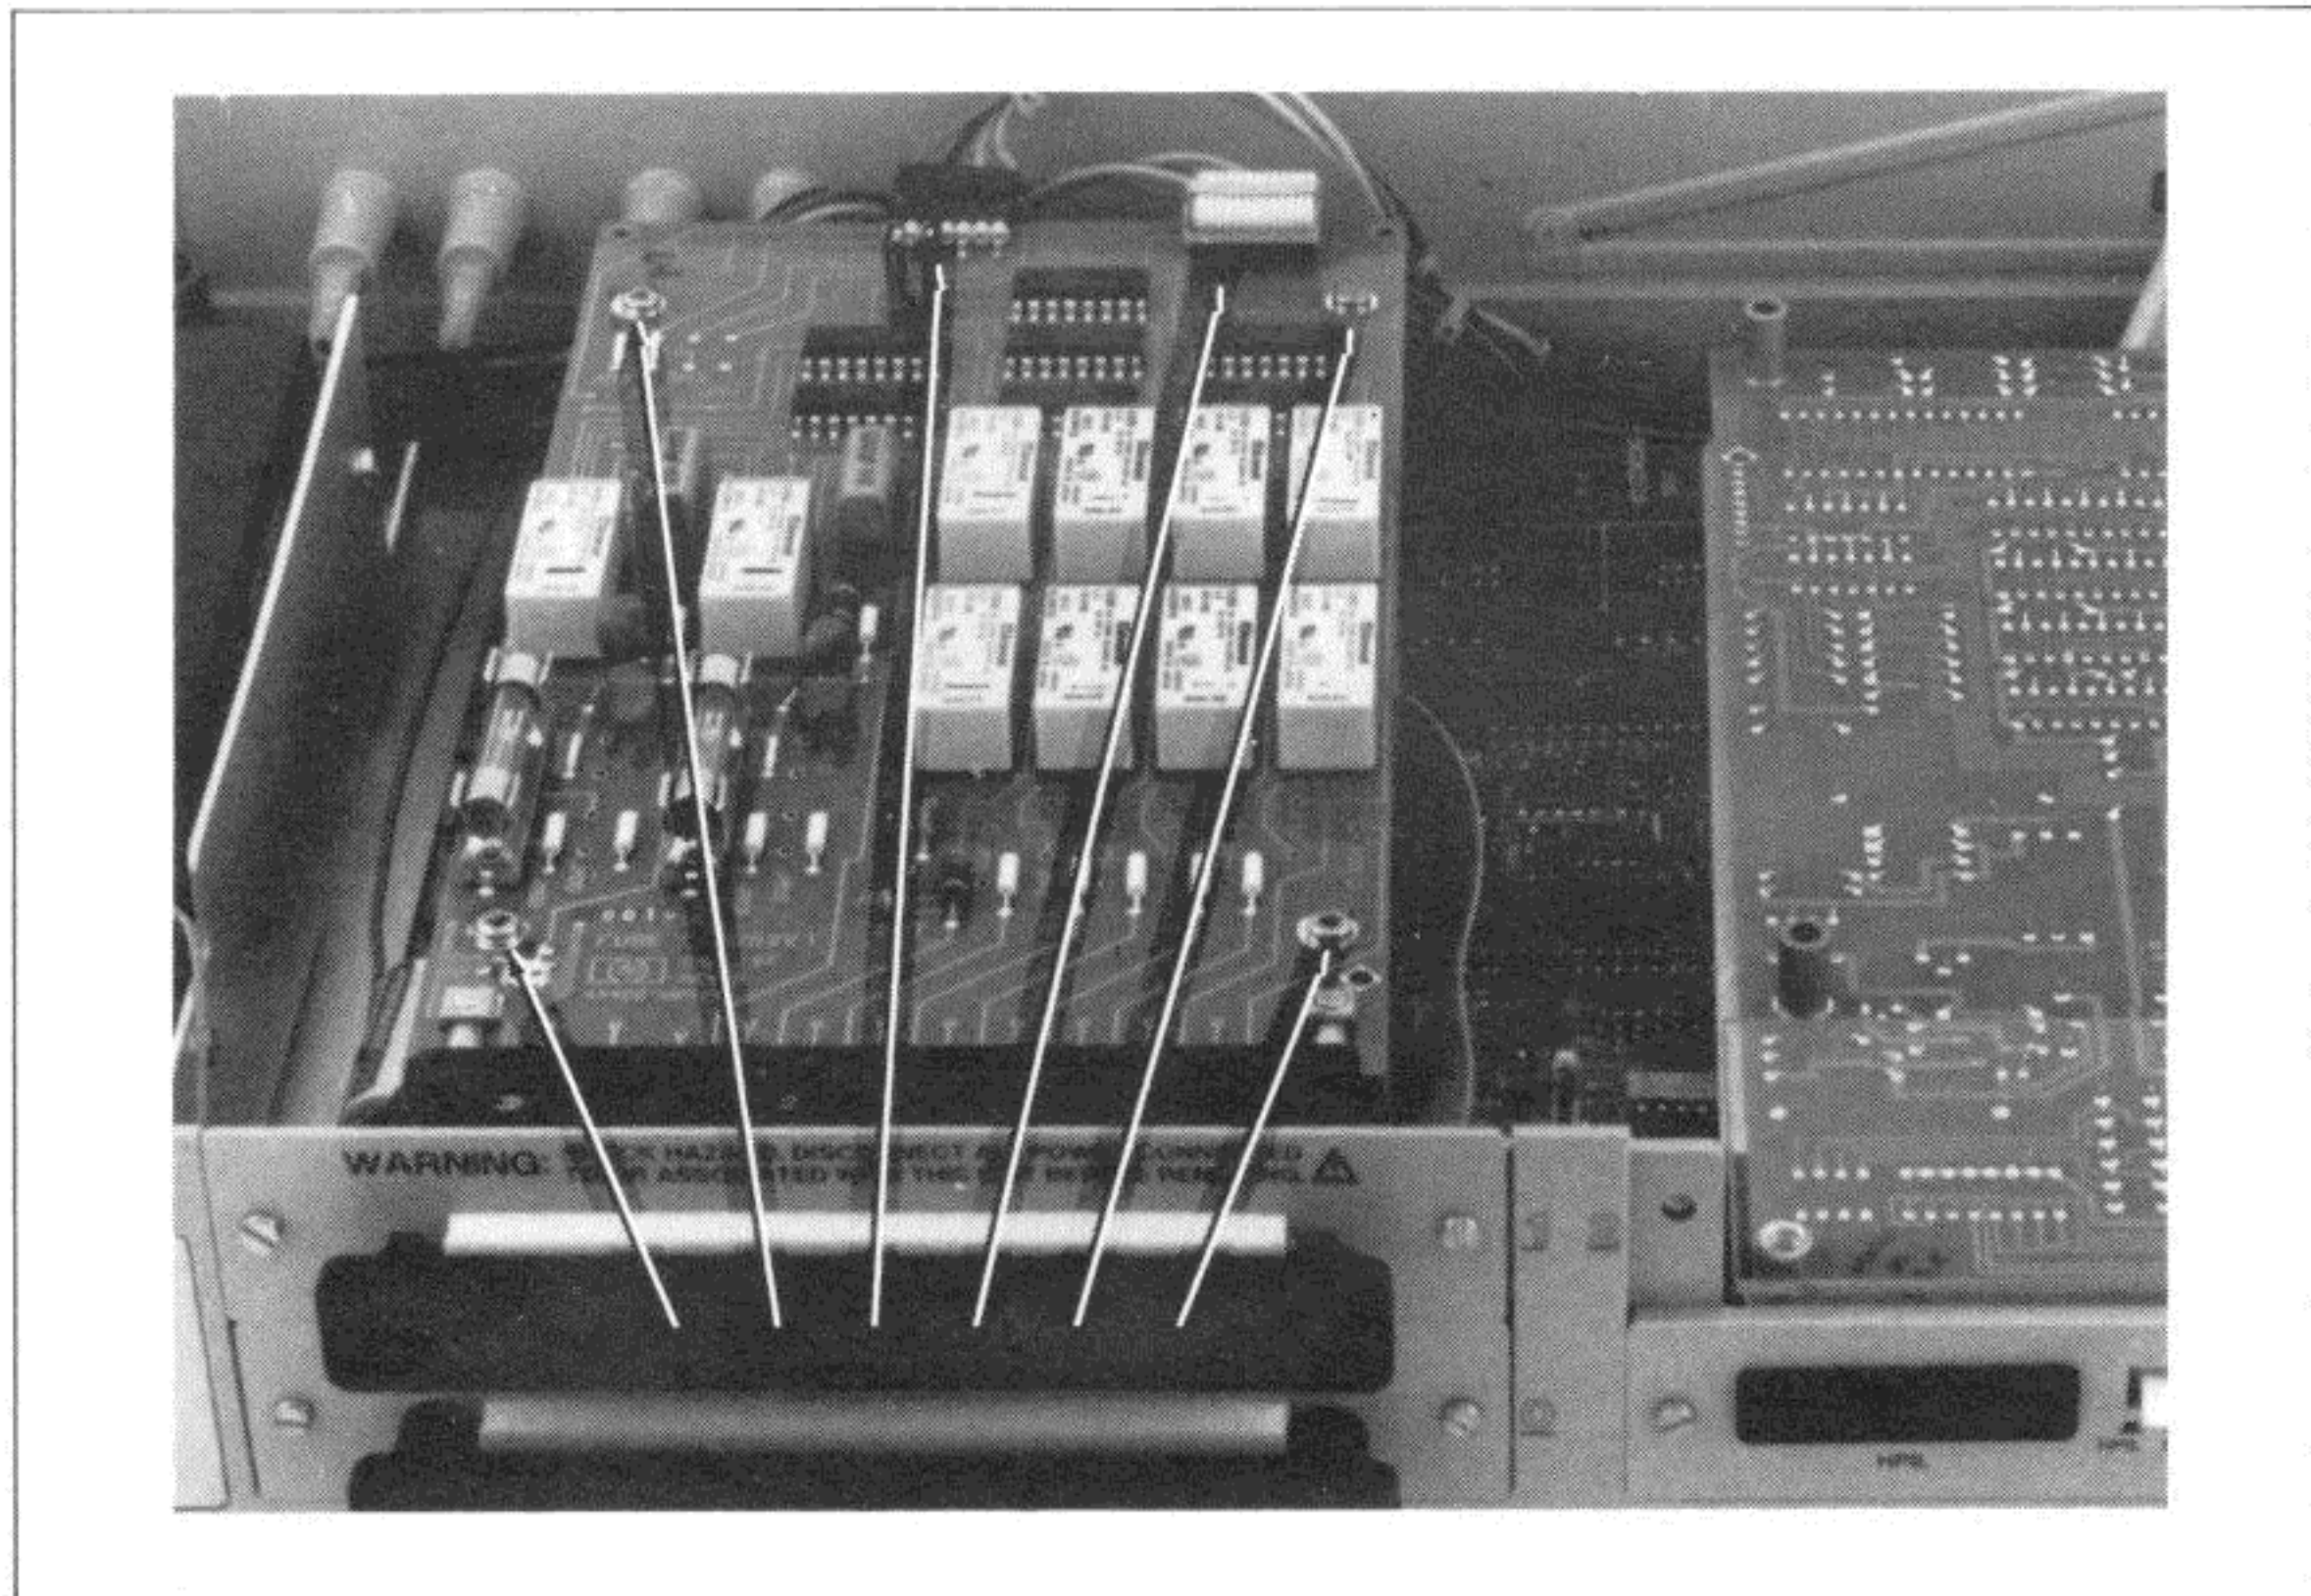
Unplug Option Cable(s) and Remove Option Screws
